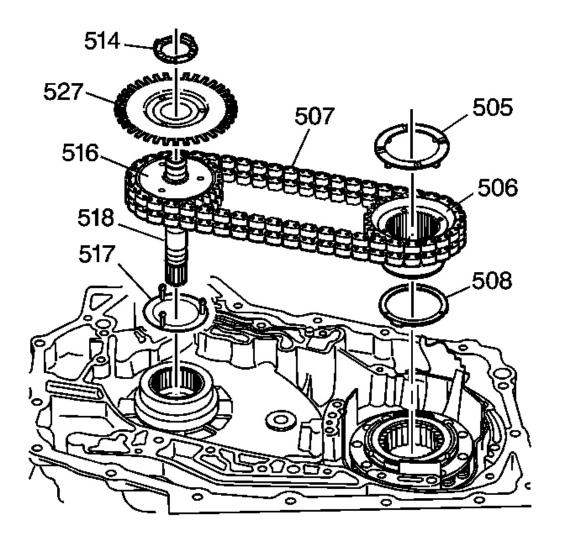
View Of Drive Sprocket, Driven Sprocket and Drive Link Components Courtesy of GENERAL MOTORS CORP.
